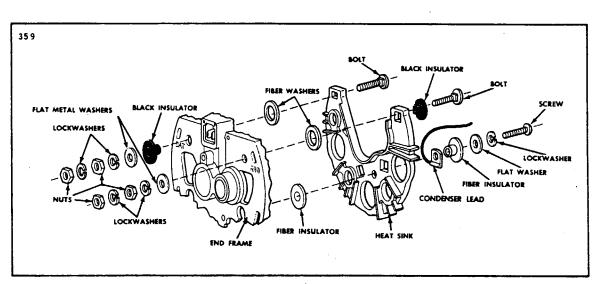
Exploded View of Heat Sink Assembly (Delco)
